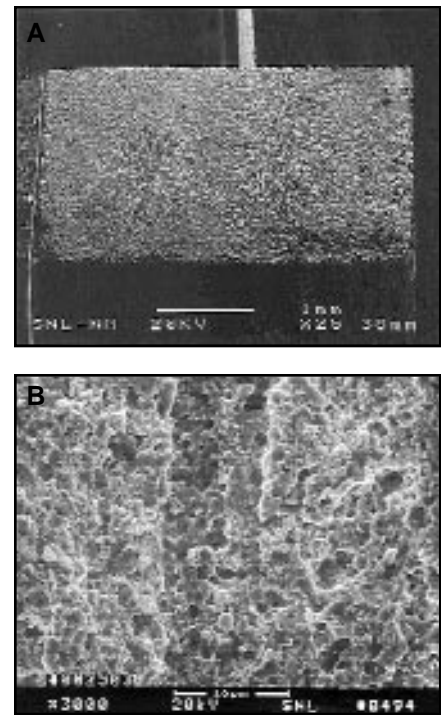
A — Low-magnification SEM photograph of the fracture surface of a Type 347 stainless steel base metal/Au-Ni-Ti filler metal joint tested in the as-fabricated condition; B — a high-magnification photograph of the same.
